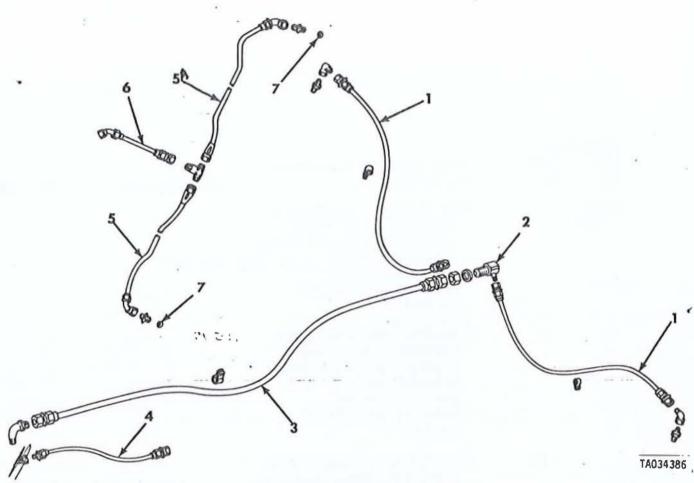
Injection pump, turbosupercharger, and oil cooler oil hoses.
